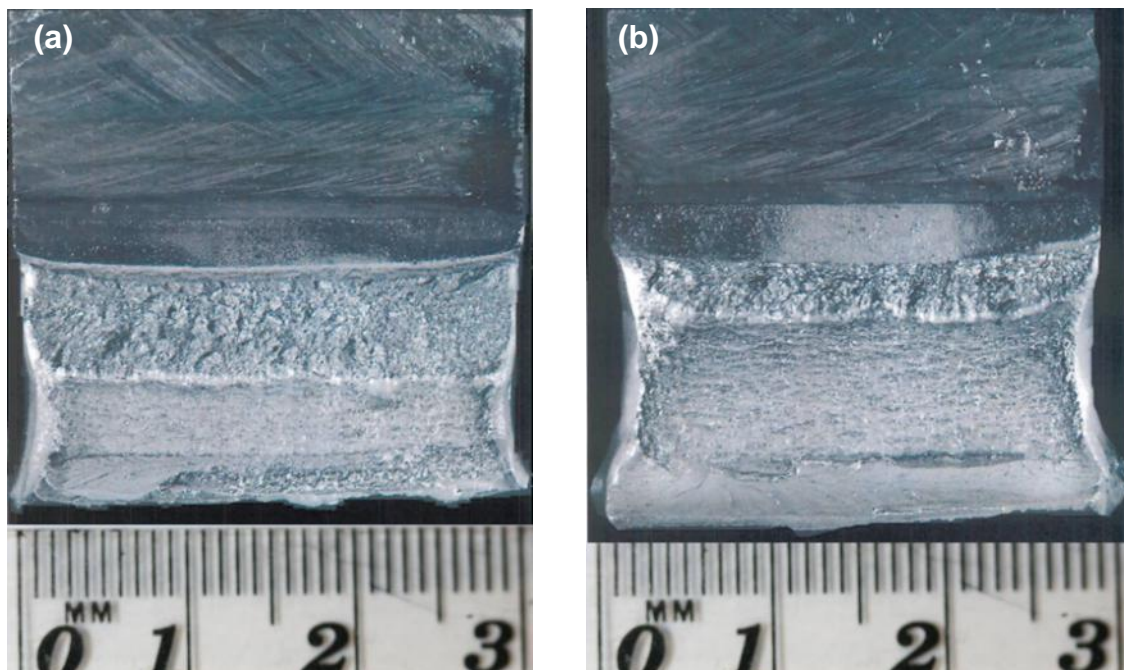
Pictures of the CTOD samples broken faces of X70 SAW (a) weld 1 and (b) weld 2
